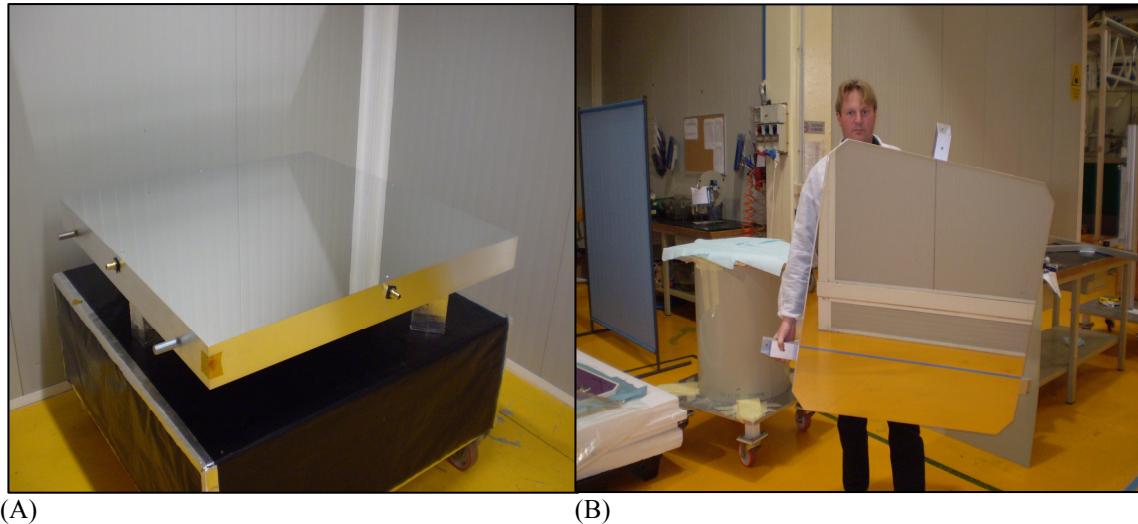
(A) An aluminum master used for the cold slumping technique and a mirror prototype; (B) a mirror produced using the master.
